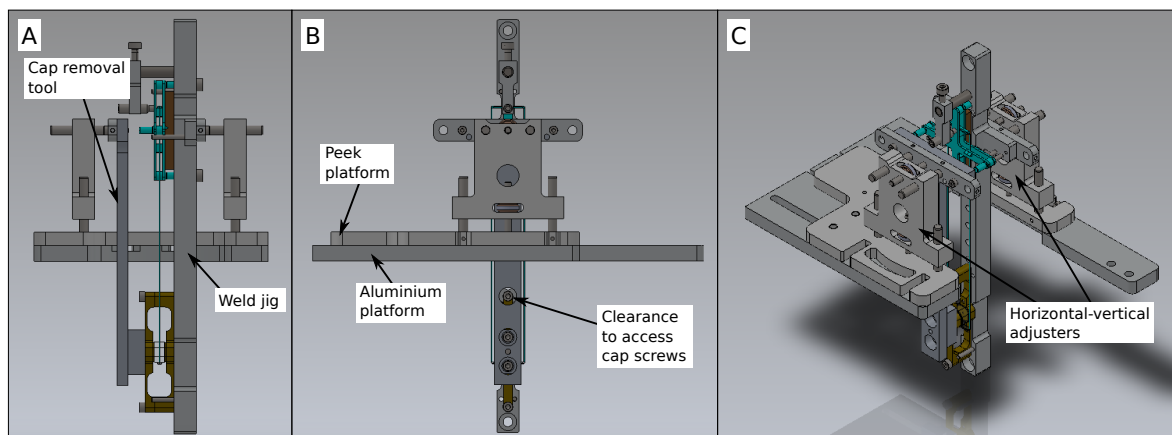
Computer-aided-design model of the weld jig in the switchable ECD assembly. Picture A shows a side view of the assembly in which the cap removal tool can be seen attached to the left horizontal-vertical adjuster and interfaced with the 1 g mass cap. Picture B depicts a front view of the assembly in which the back of the cap removal tool is shown. A clearance hole is implemented for access to the mass cap screws. In Picture C the isometric view of this assembly is presented.
